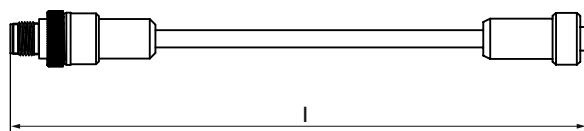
Connecting cable/extension cable M12 ↔ M12; l = 2 m, 5 m, 10 m, 20 m, 50 m
